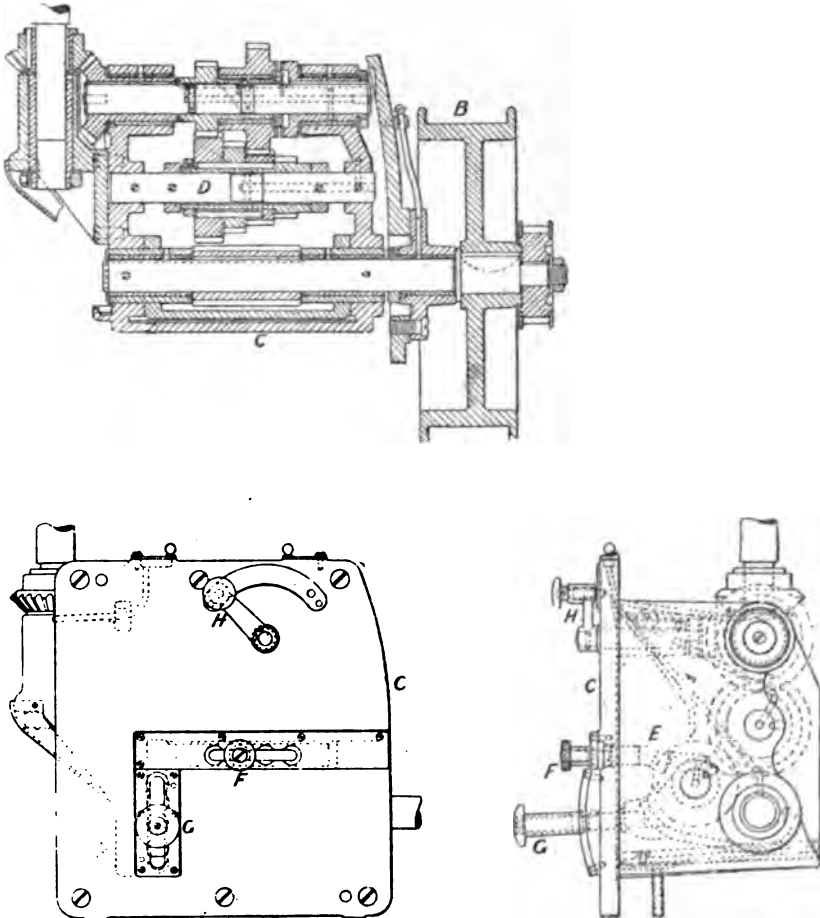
Details of Variable Feed Mechanism for driving Spindle.
